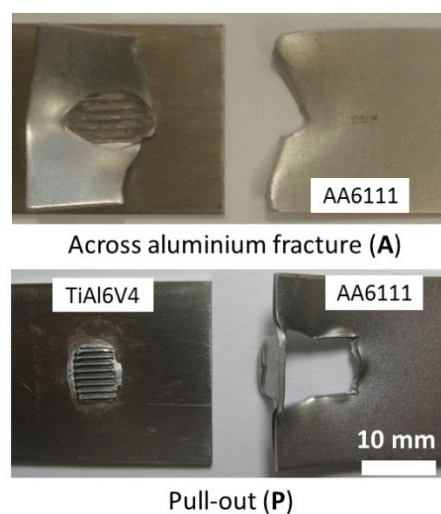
Fracture path of round tip weld (upper) and rectangular tip weld (lower), both in as-welded condition.
